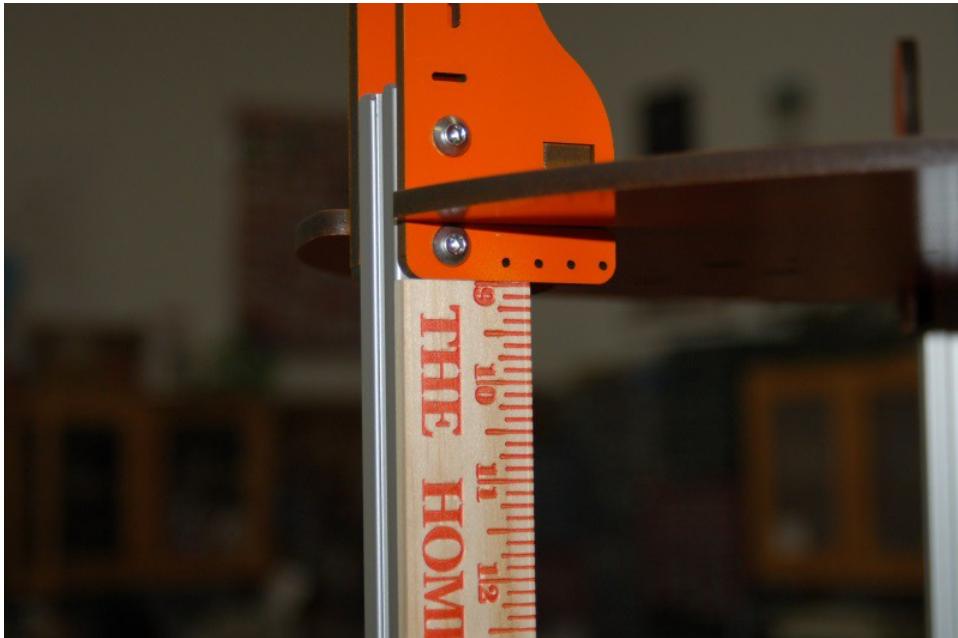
Adjusting the Idler Bracket height using the height gauge.
